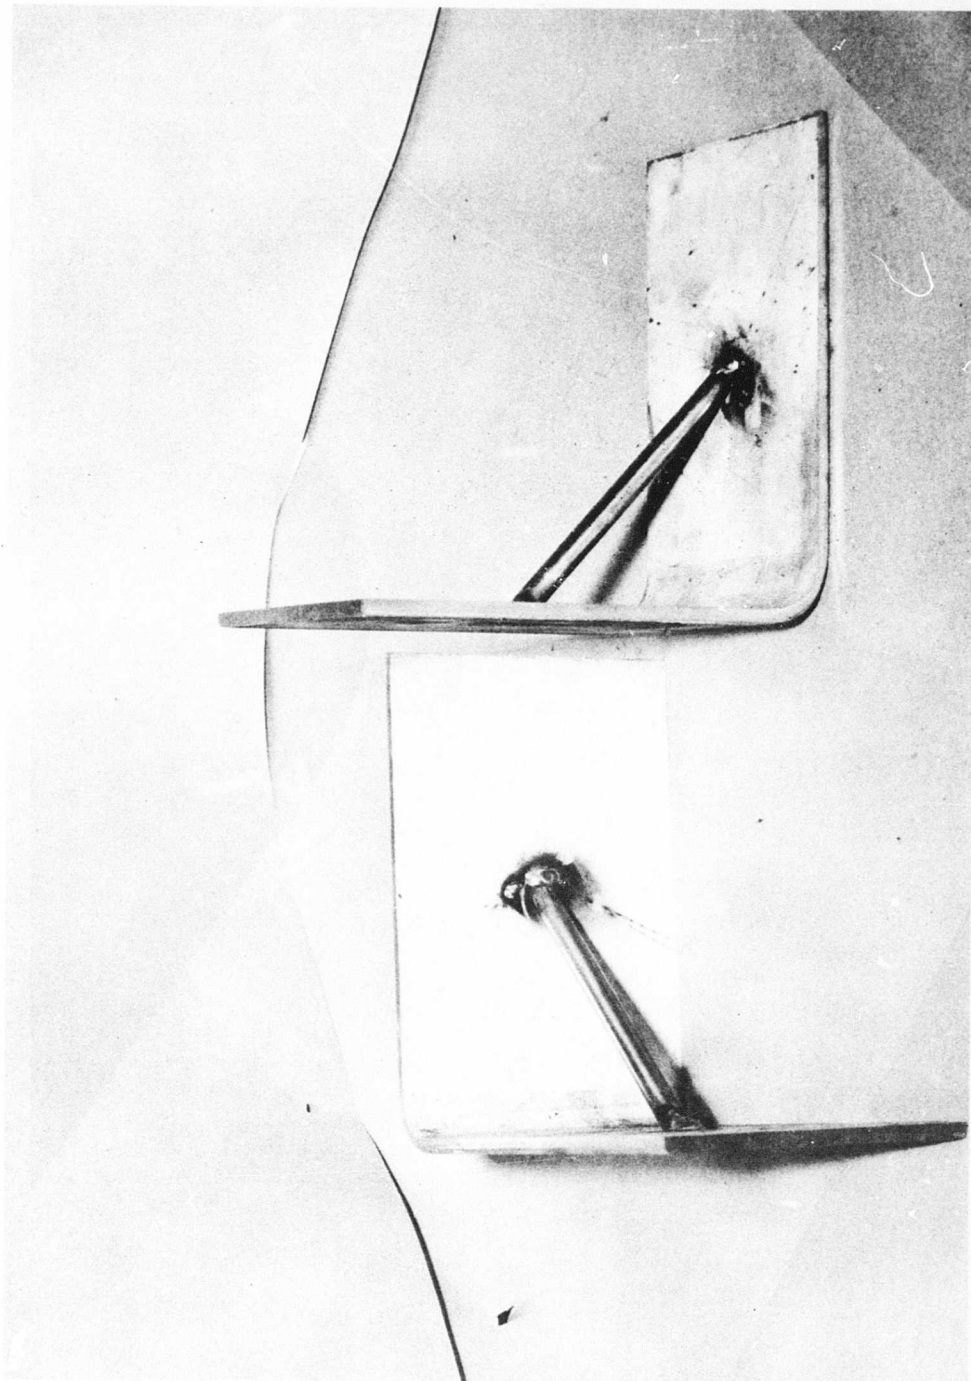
Restraining Bar Welded Into Bend Specimens.
